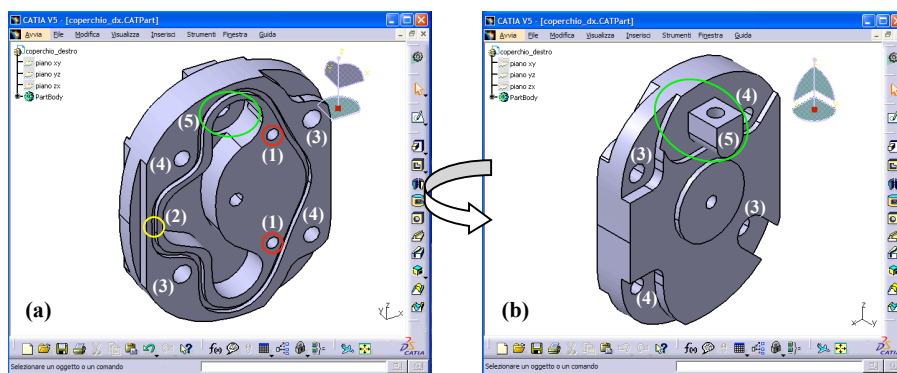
Cover geometry, (a) front and (b) rear view.
